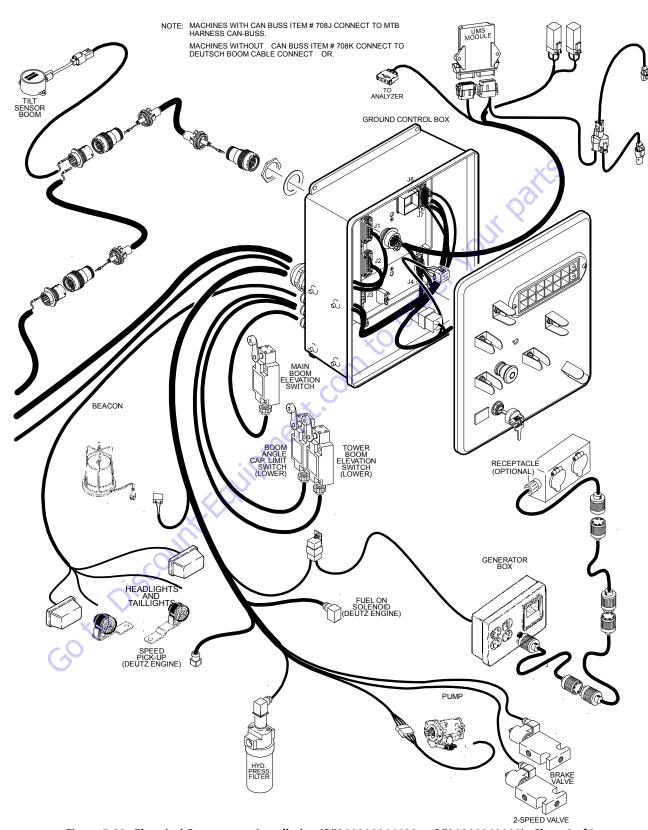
Electrical Components Installation (S/N 00300064432 to S/N 0300069000) - Sheet 2 of 2
